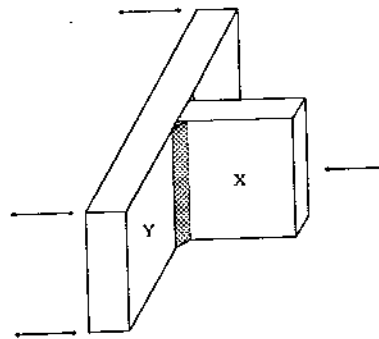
UKDEn Load Carrying Fillet and T Butt Weld 2
